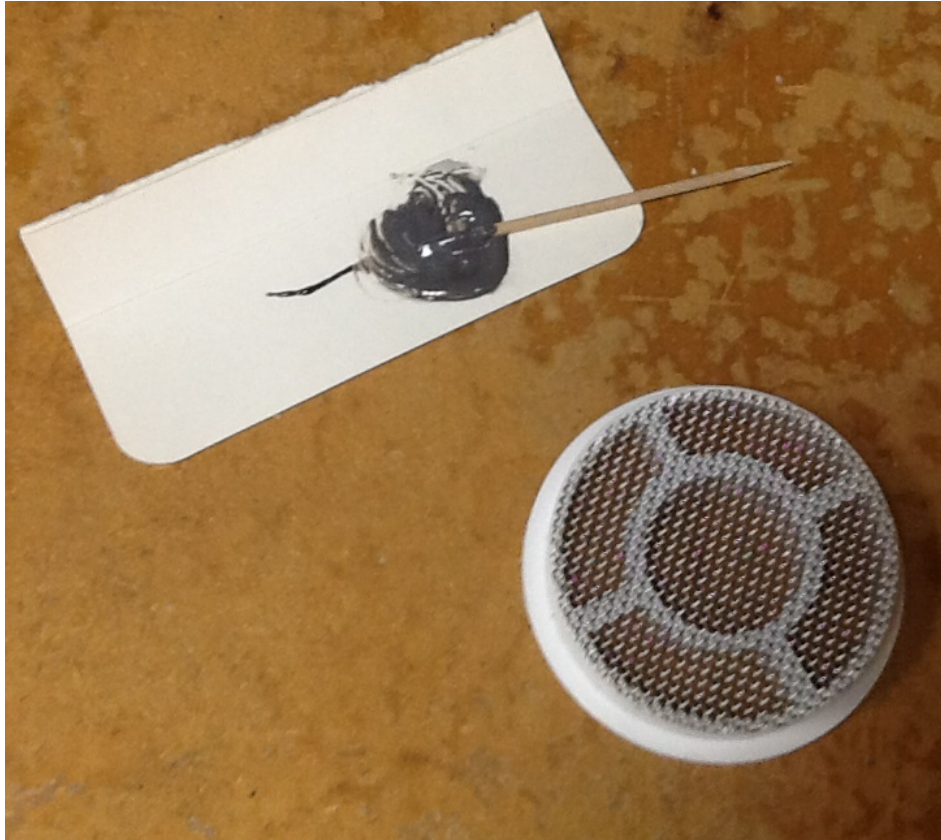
Fabrication of filter supports step 11. JB Weld™ epoxy was applied using a toothpick to hold the coarse mesh screen in place.
